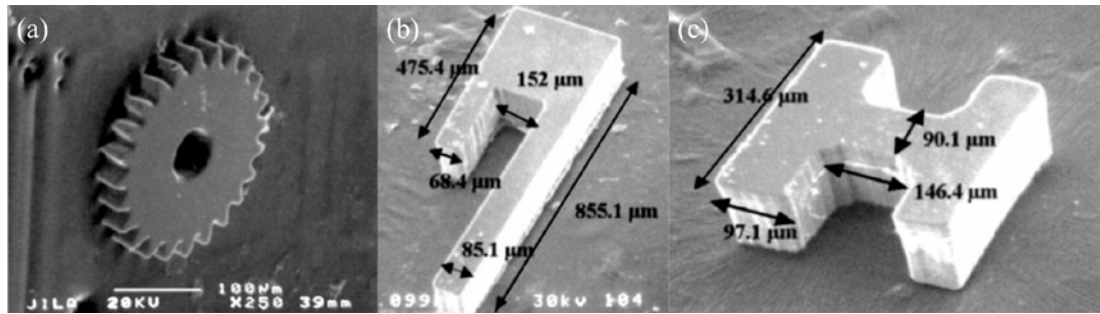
(a) Gear (200mm diameter and 45mm thick); (b) cantilever beam (137mm thick); (c) tensile test sample (142mmthick) [204].
